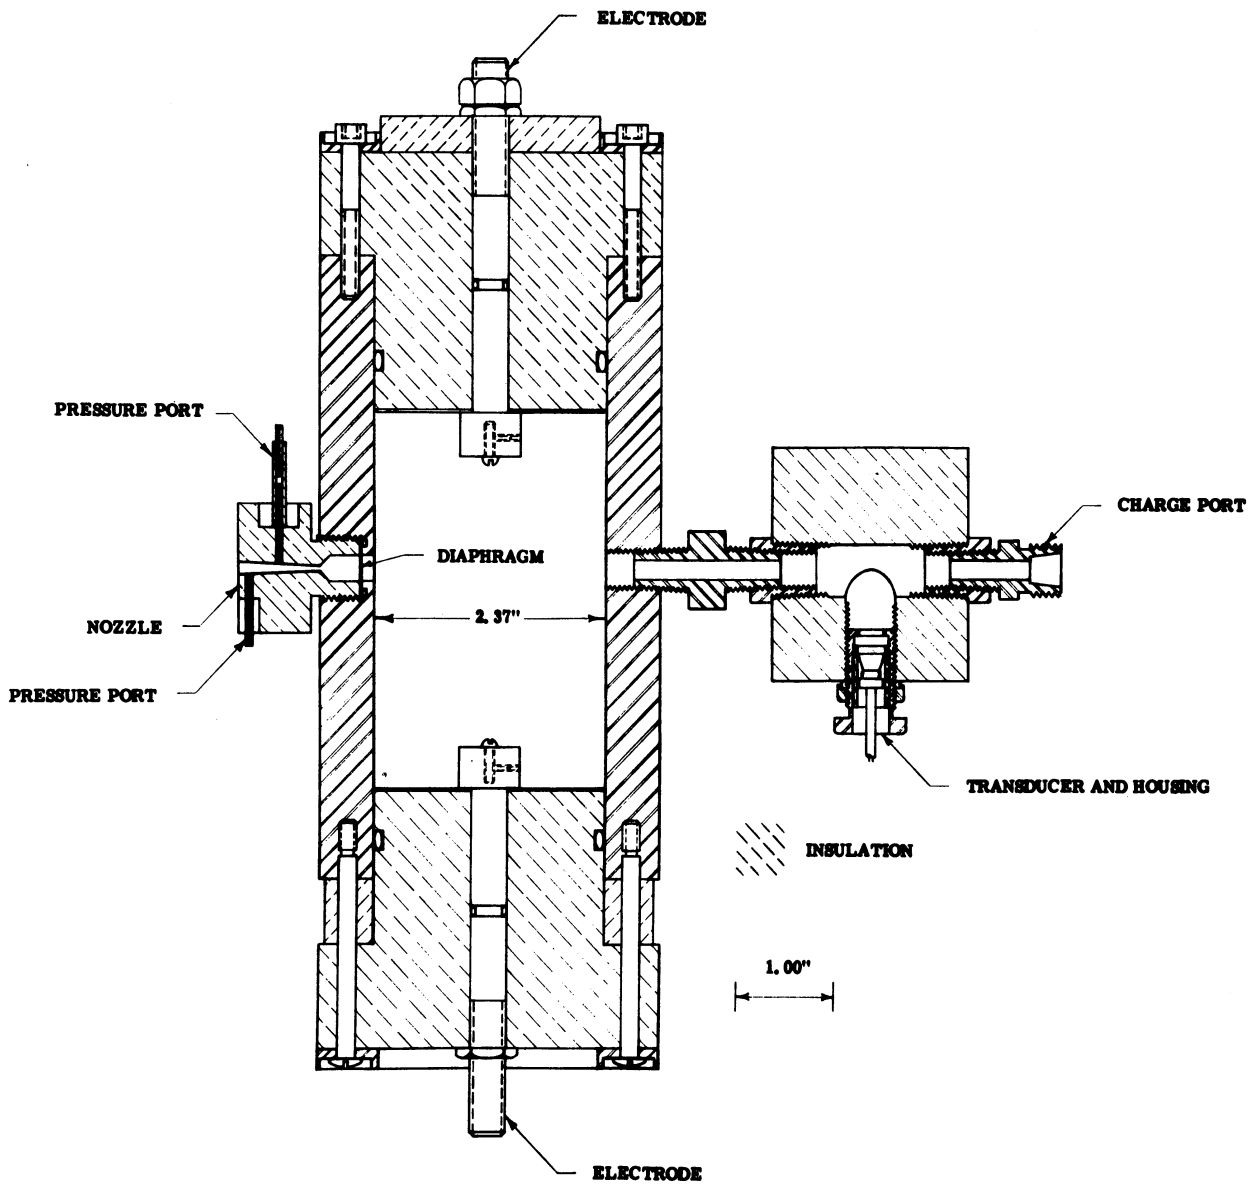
Schematic of Exploding Wire Chamber and Nozzle Arrangement.
